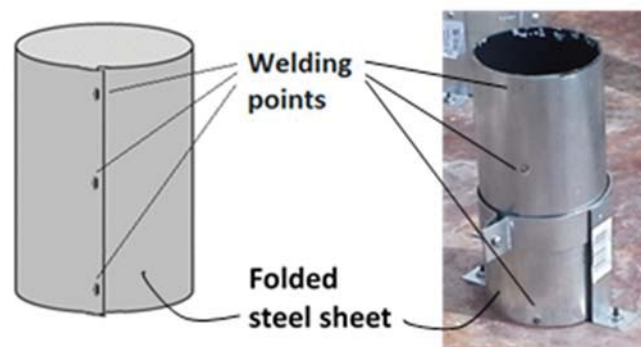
Galvanized steel sheet forming the sleeve, with three welding points.
